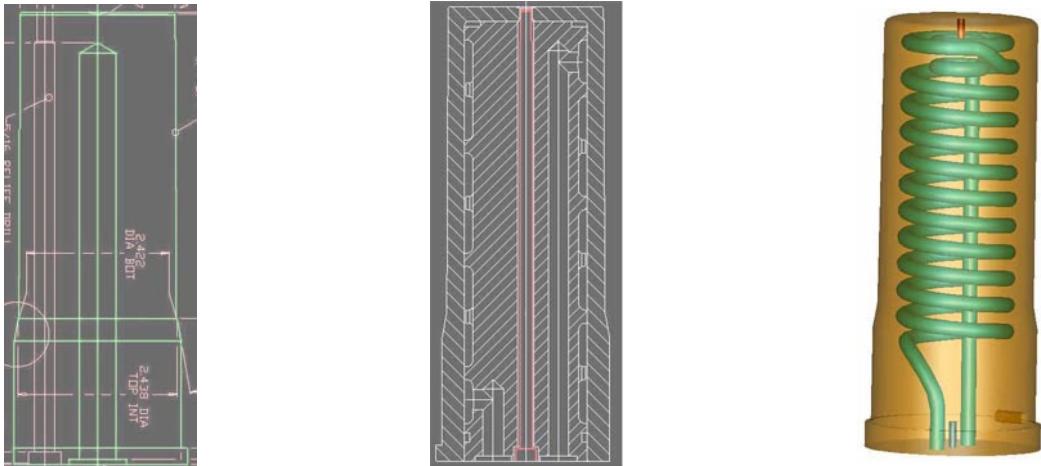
Three cores tested in an injection molding application including a conventional baffle, an insert with cooling rings and a 3D Printed conformally cooled core.
